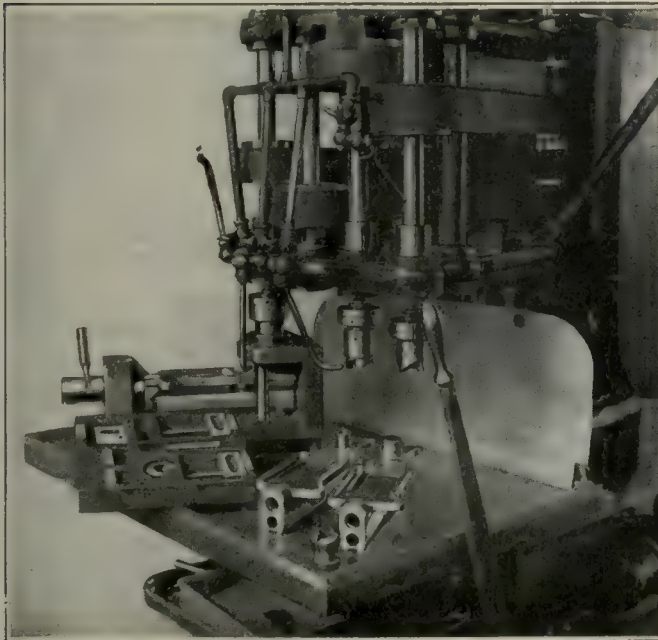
HOLLOW MILLING THE MAGAZINE BOSS ON THE RECEIVER
